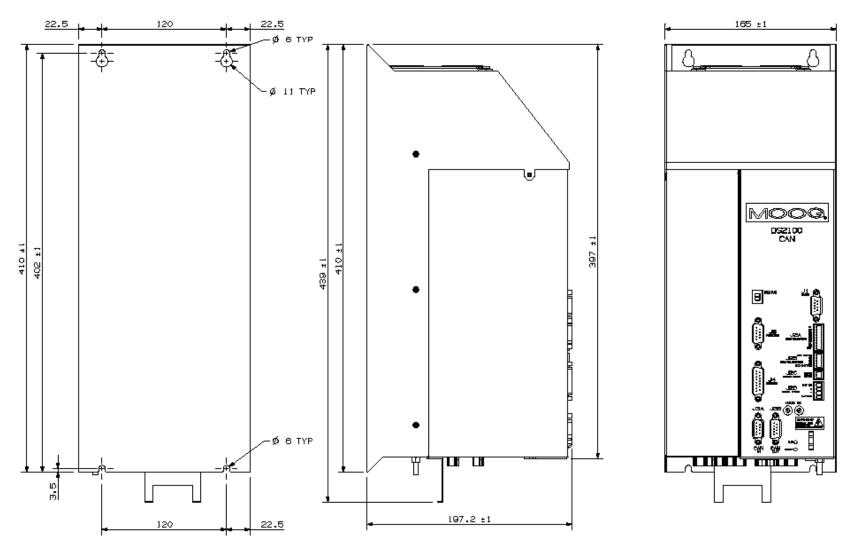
DS2100 C Mechanical & Mounting Dimensions
